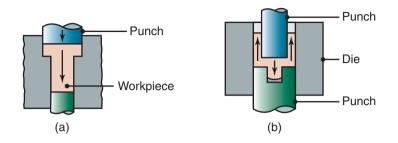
Two examples of cold extrusion; arrows indicate the direction of metal flow during extrusion.
